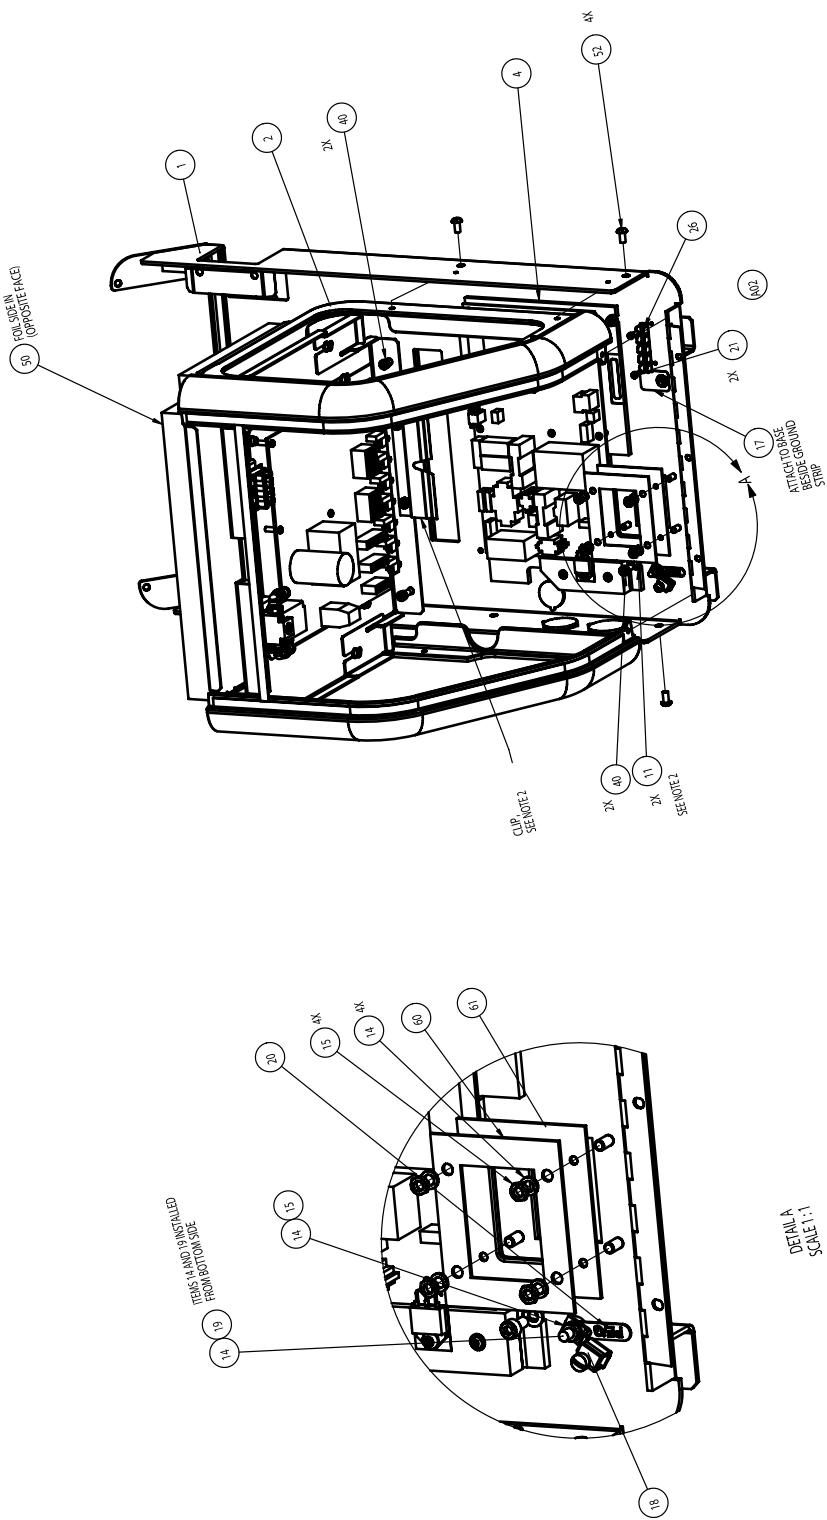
Chassis parts, 400/480V Delta, M4/M6/M9 (1 of 2)
